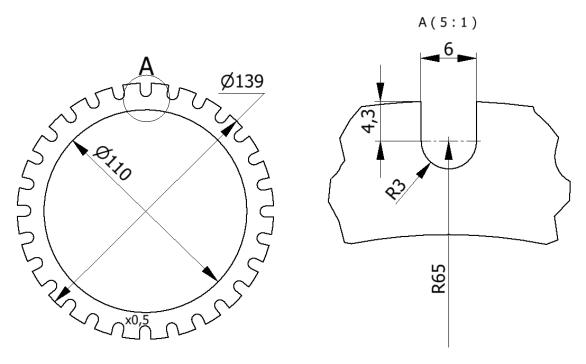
Dimensions of Rotor Sheet and Rotor Slots for Torsional Generator
